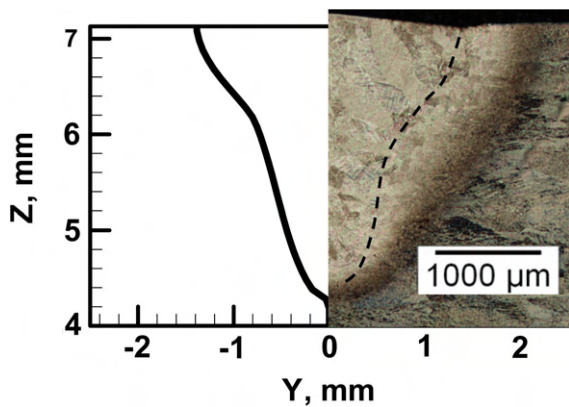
Experimental and calculated fusion zone cross-section for Ti-6Al-4V laser weld made at 16.9 mm s^{-1} welding speed and 1500 W input power. The computed cross-section is shown by the solid line and the experimentally determined fusion zone cross-section is shown by the dotted line.
